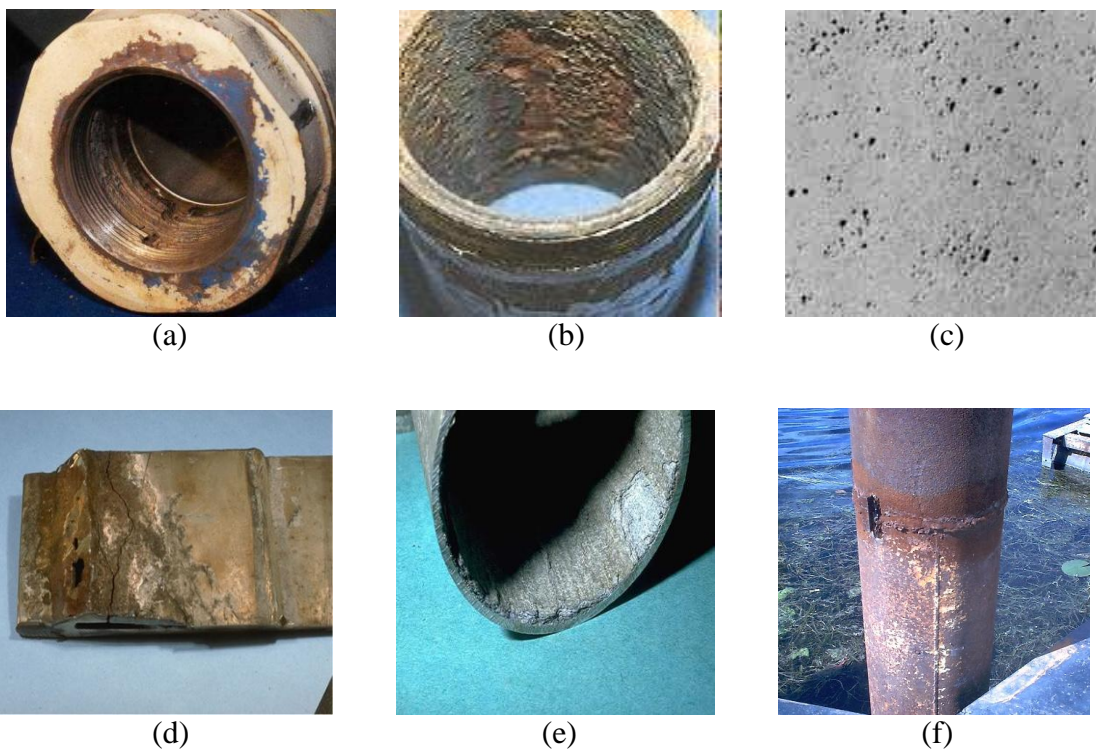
Types of corrosion: (a) Galvanic corrosion, (b) Concentration cell corrosion, (c) Pitting, (d) Stress corrosion cracking, (e) Intergranular corrosion and (f) Uniform corrosion attacks [14-19]
